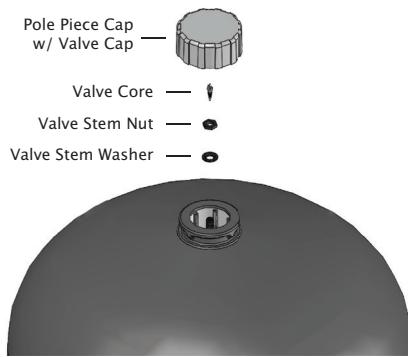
Remove Pole Piece Cap w/ Valve Cap, Valve Stem Nut and Washer
